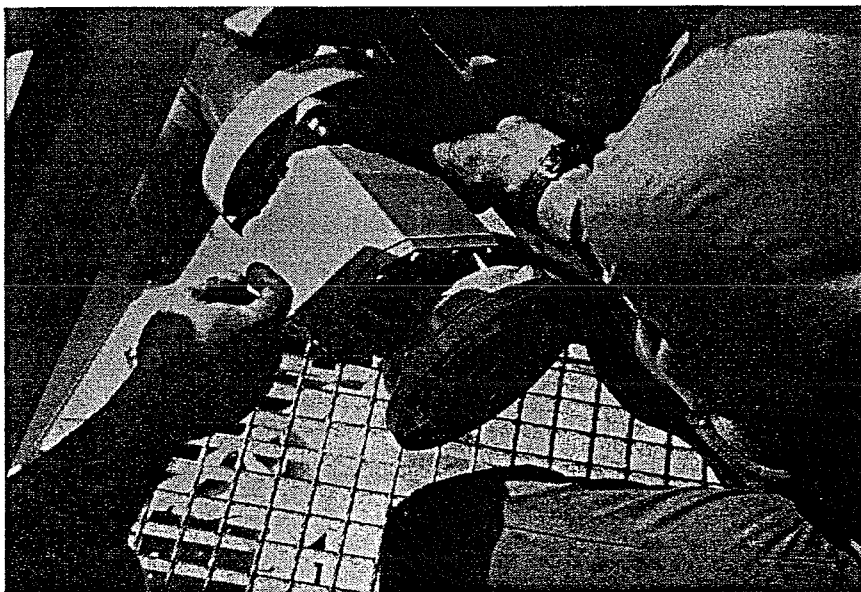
Positioning the joint trunnion in the elevation frame
